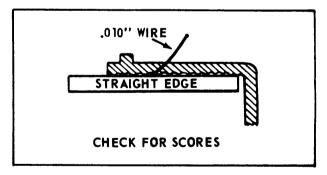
CHECKING FOR SCORED DRUM.
